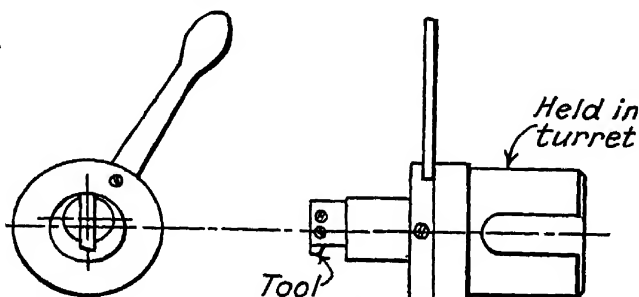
ECCENTRIC RECESSING TOOL WHICH IS FED RADIALLY INTO A BORE TO CUT A RECESS
